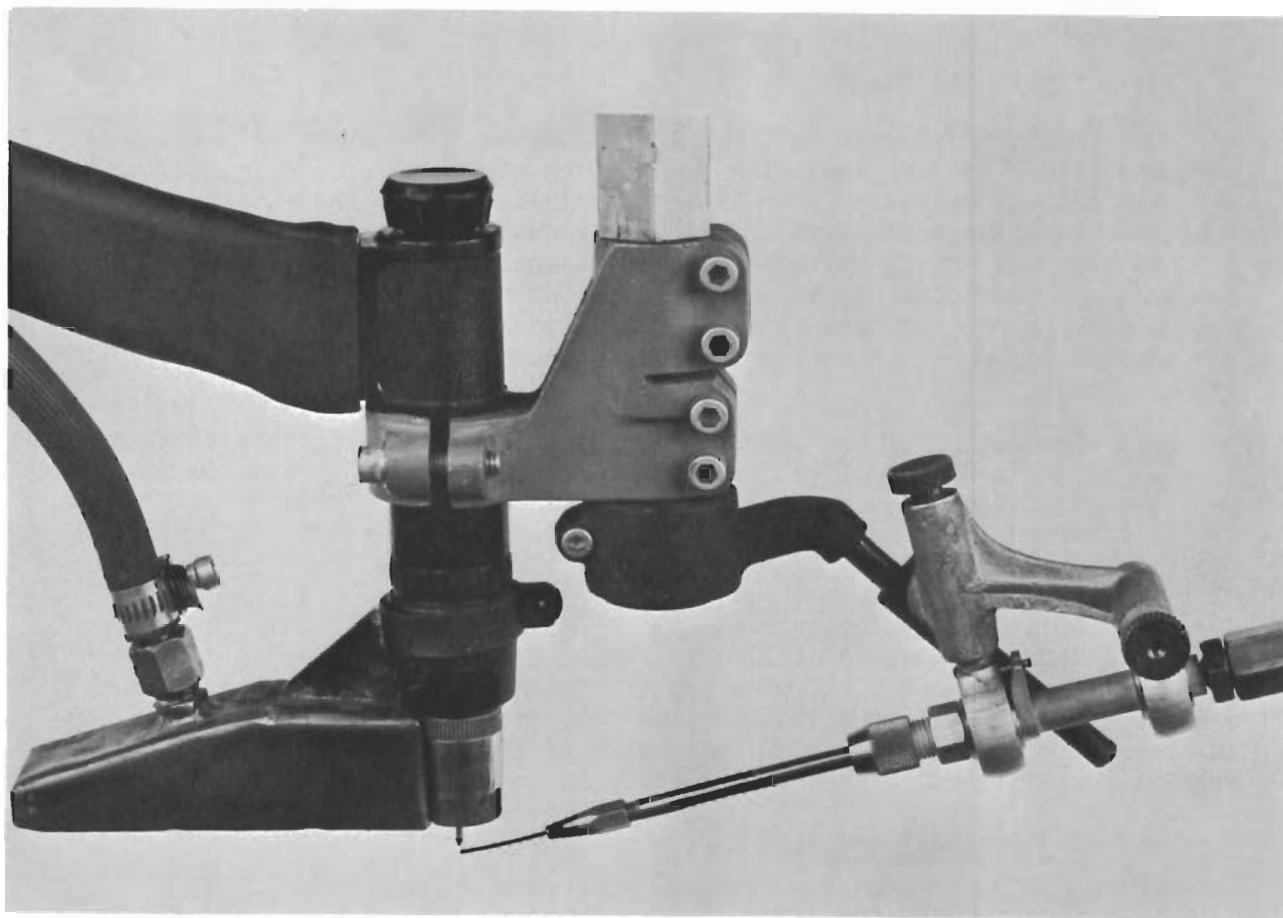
Automatic Tungsten Inert Gas Shielded Welder and Control
